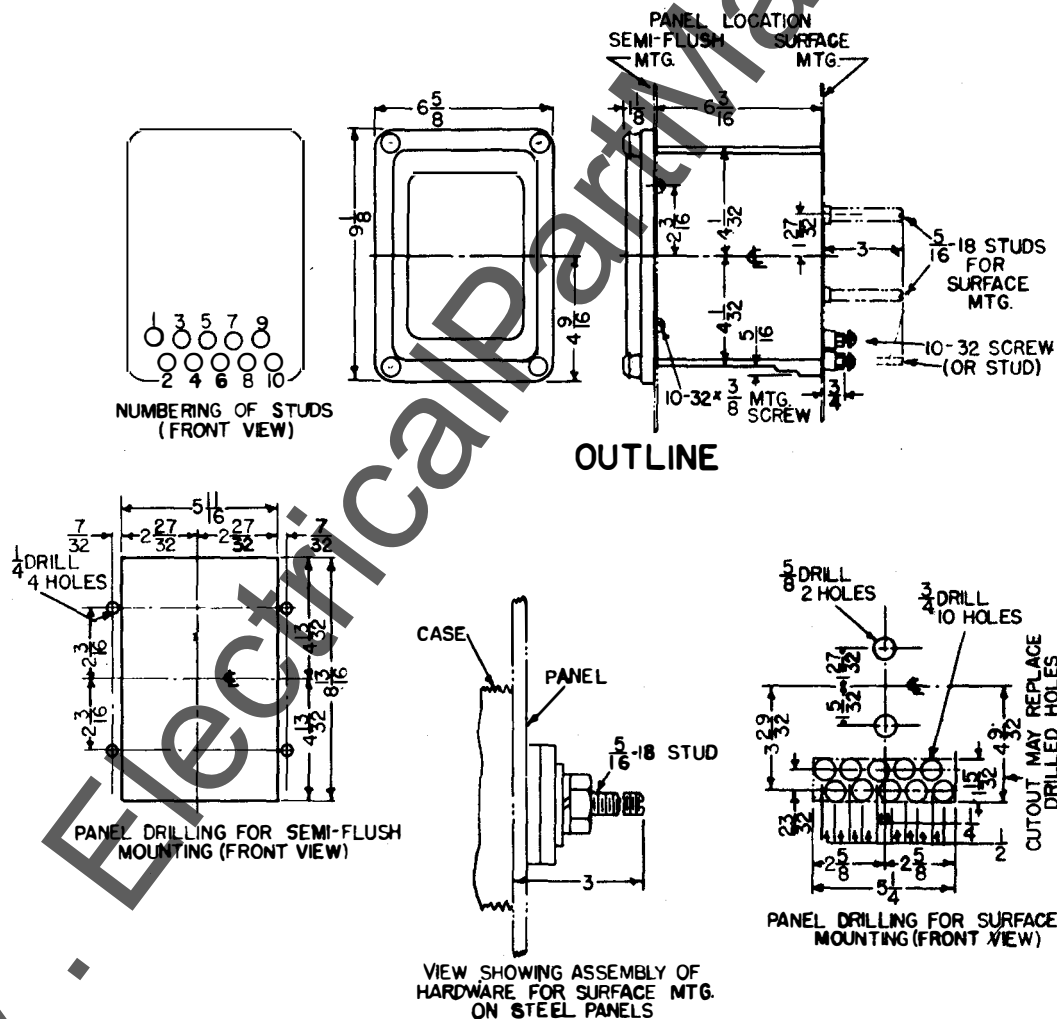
Outline and Panel Drilling for Type TMC11A Relay
